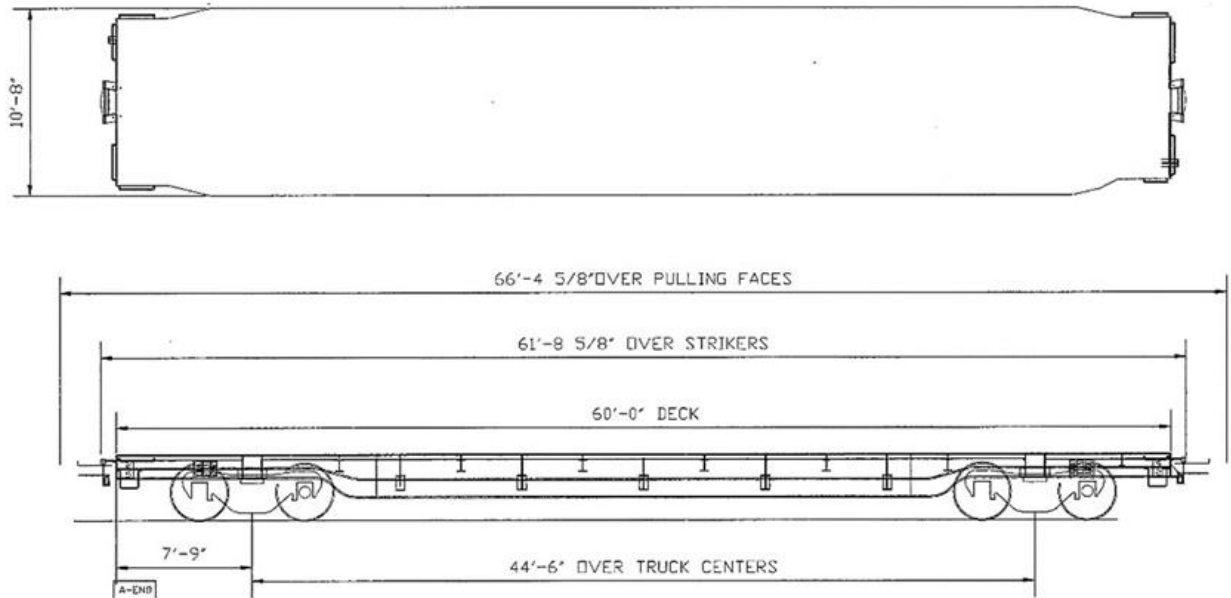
Buffer railcar IDOX 020001 arrangement drawing
